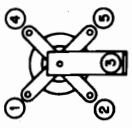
CHASSIS HS-124 PARTS LOCATION - BOTTOM VIEW
